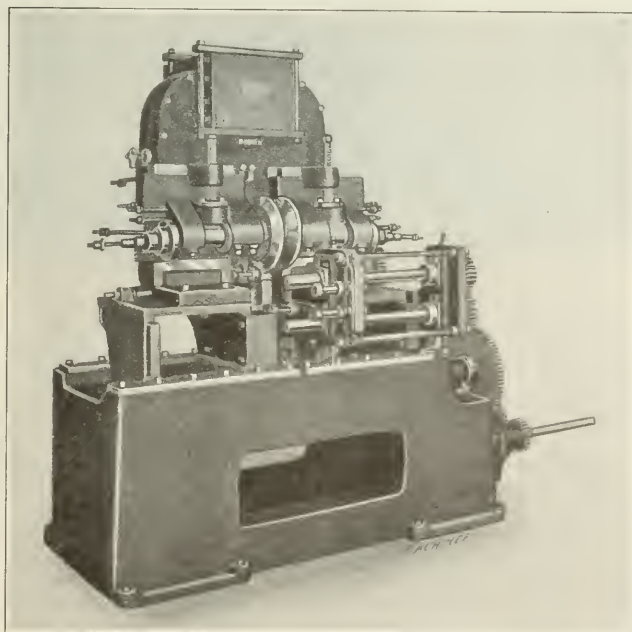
Special Butt Seam Welder built by the Thomson Electric Welding Co. for seam-welding Tubing at the Rate of 20 to 30 Feet per Minute
